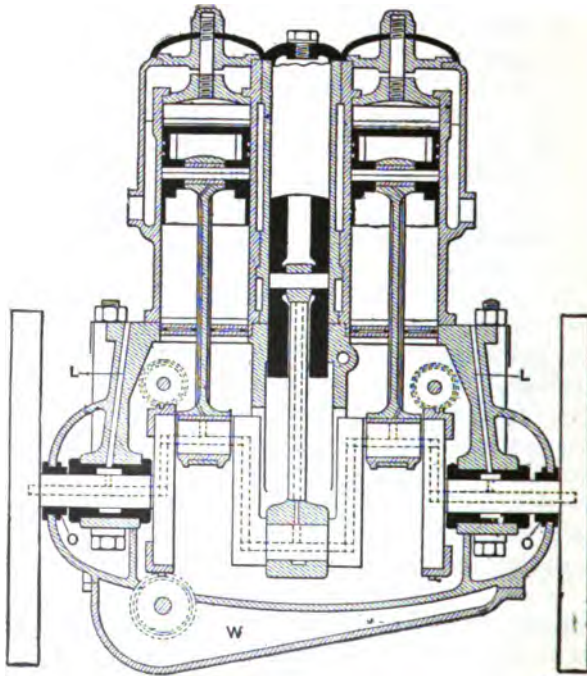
The Gobron-Brillie Two-cylinder, Four-piston Balanced Engine.
